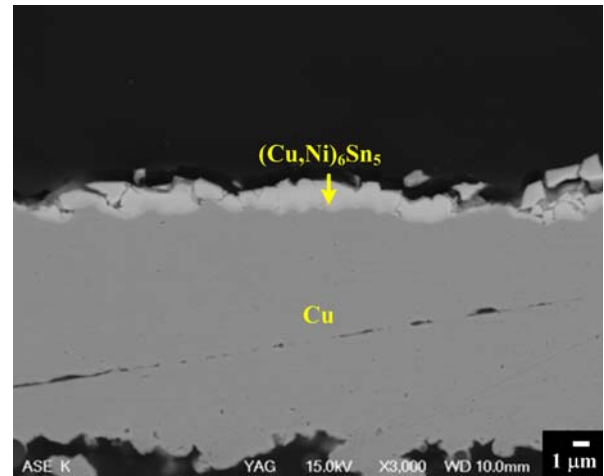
Cross-sectional examinations of fractured solder joint: Sn-1.2Ag-0.5Cu-0.05Ni with the IT substrate pad finish after three reflows.
